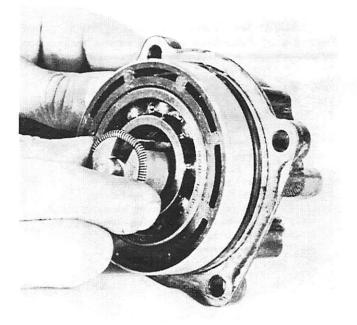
Inserting Ball Bearing Puller into End Cap Ball Bearing
